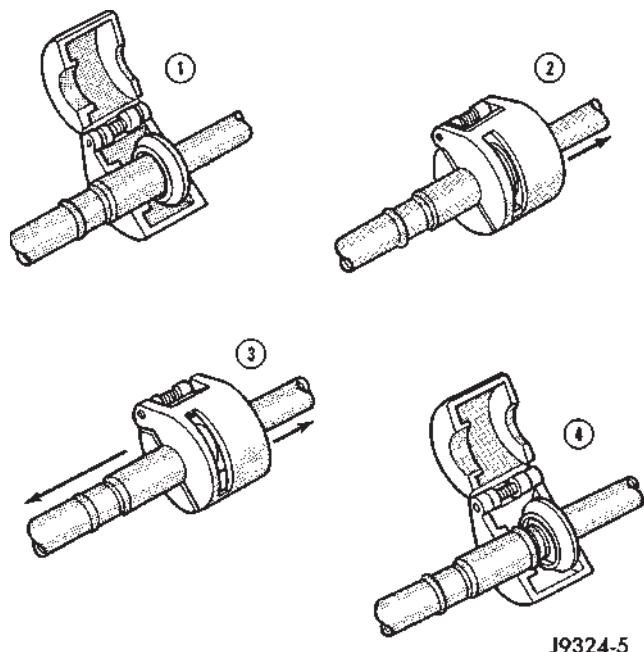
REFRIGERANT LINE SPRING-LOCK COUPLER DISCONNECT
